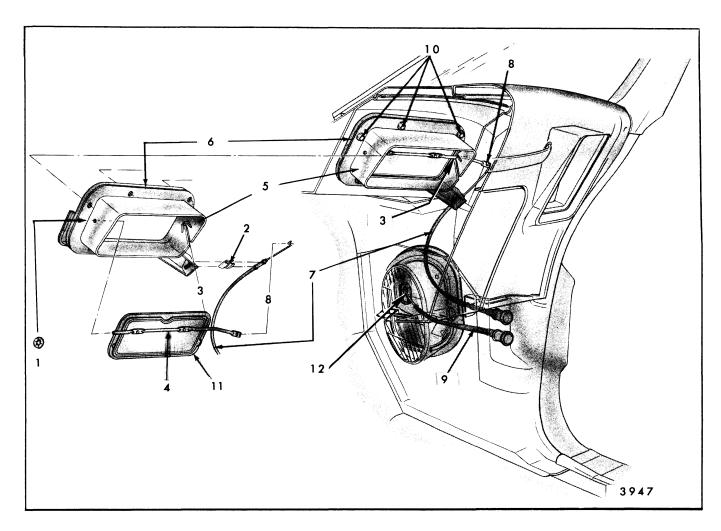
Shroud Center Duct High-Level Air Outlet and Door "F" Styles
